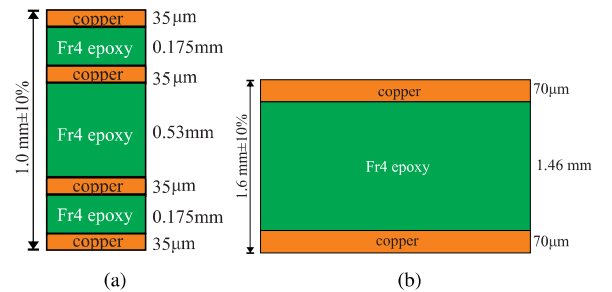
PCB layer stack-up. (a) Layout 1. (b) Layout 2.
